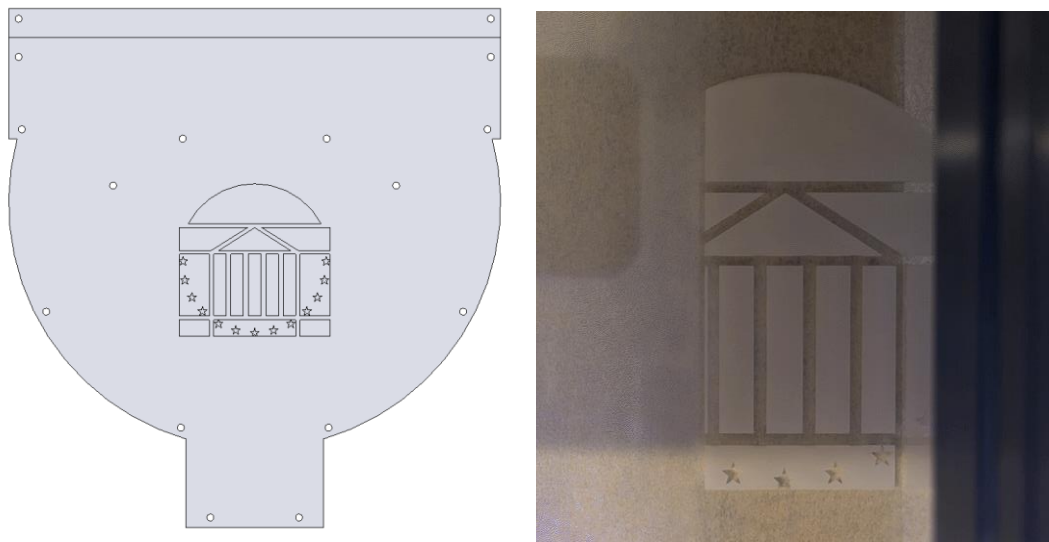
Final design for acrylic support cover (left) and cover laser cutting process (right)
